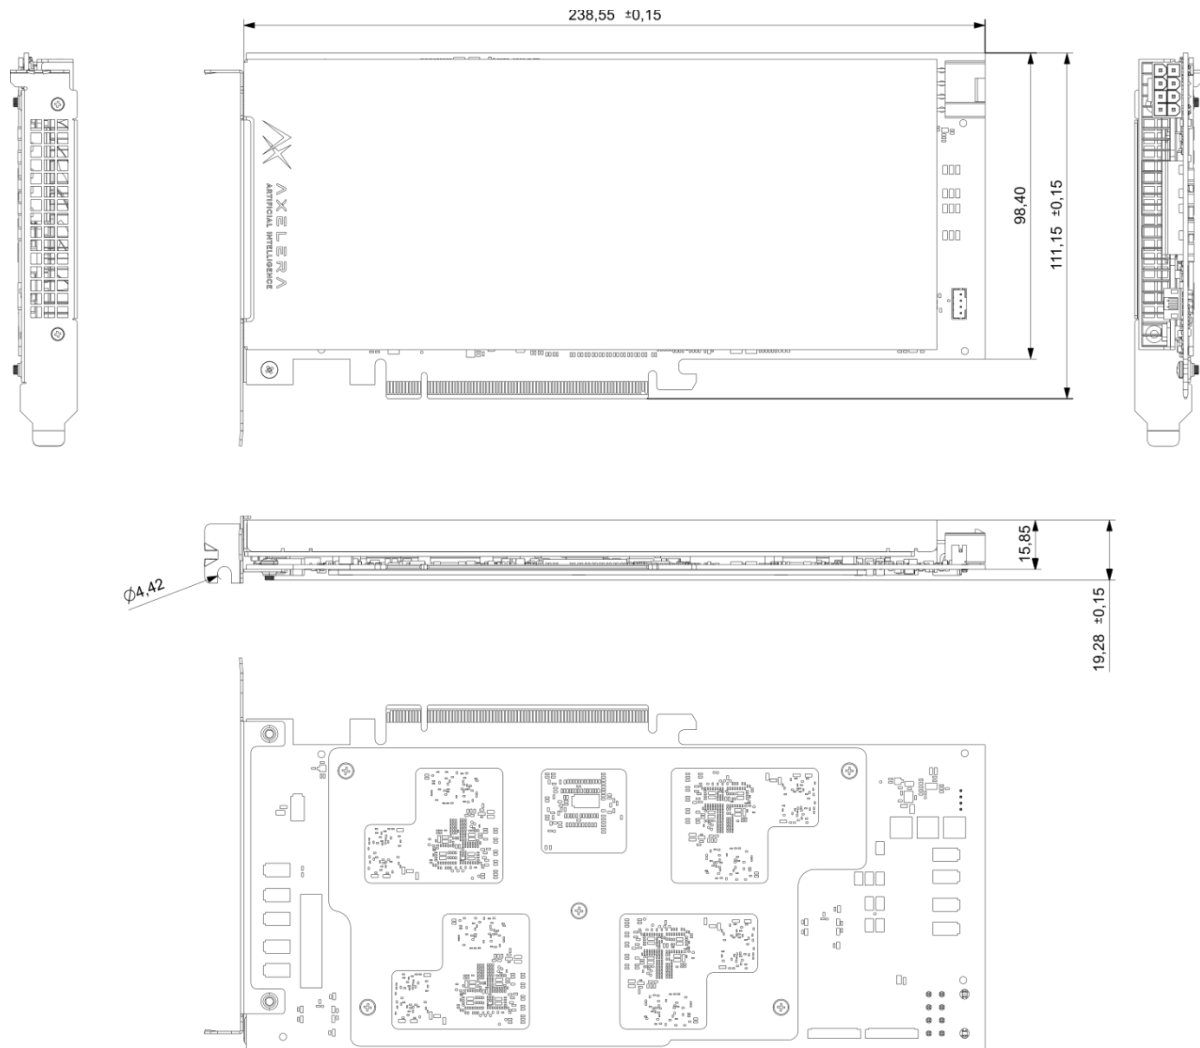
Metis PCIe 4-AIPU card package diagram showing passive cooler
